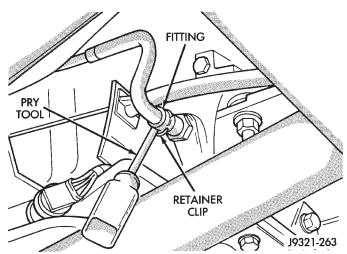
Removing Retainer Clips From Quick Disconnect Fittings
